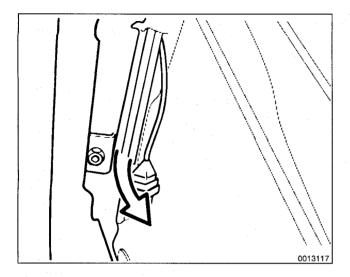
4-door cars: Remove lower retaining bolt at base of window rear guide rail and pivot rail out of door.
